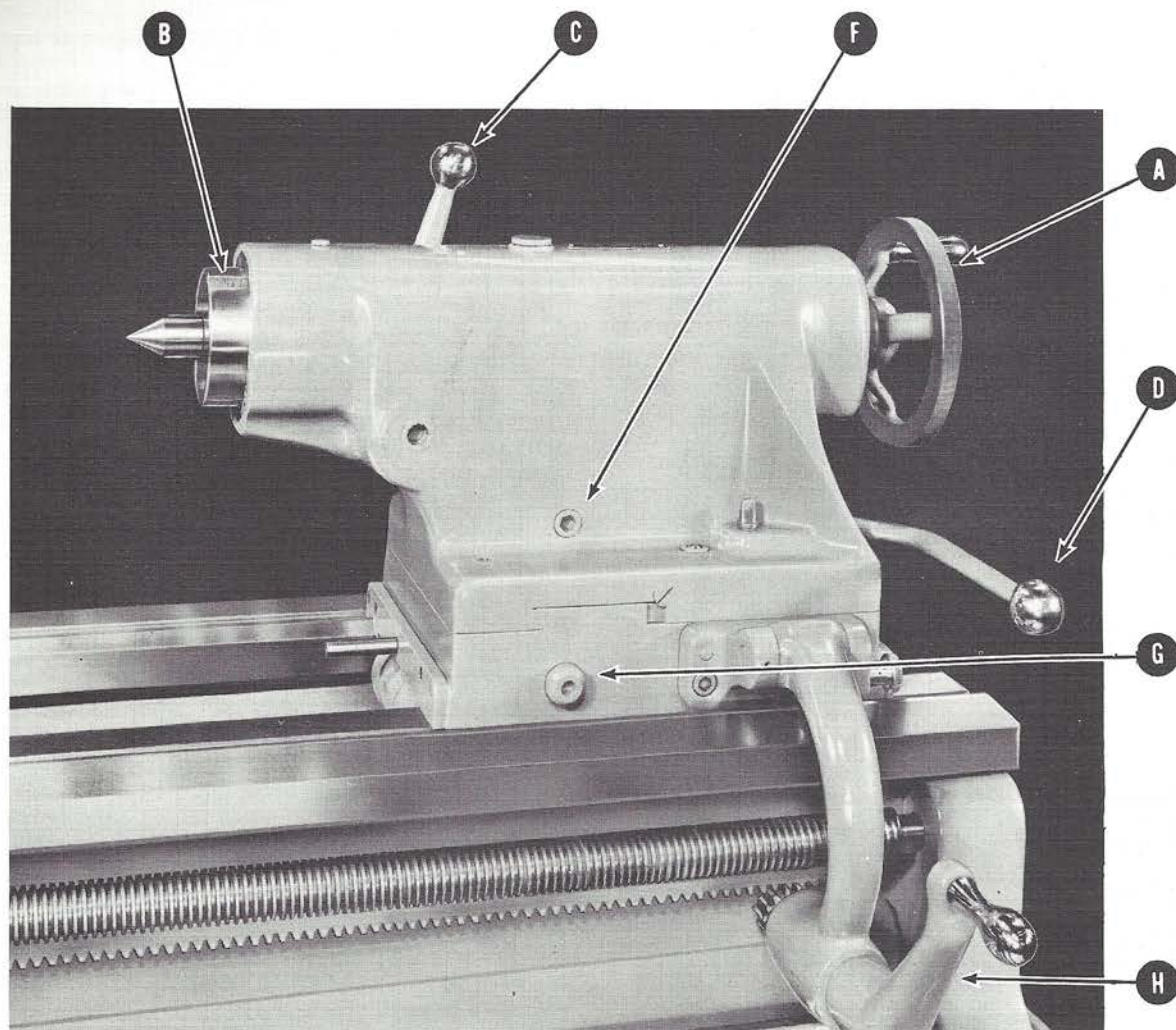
QUICK CLAMPING TAILSTOCK - 612 LATHES
